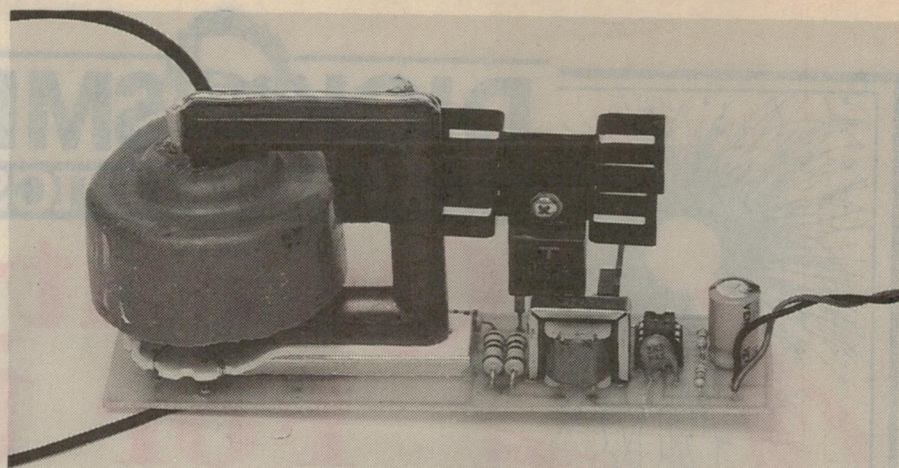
This photo shows a close up of the PCB assembly. Note the heatsink fitted to power transistor Q2. The driver FET doesn't need one.
